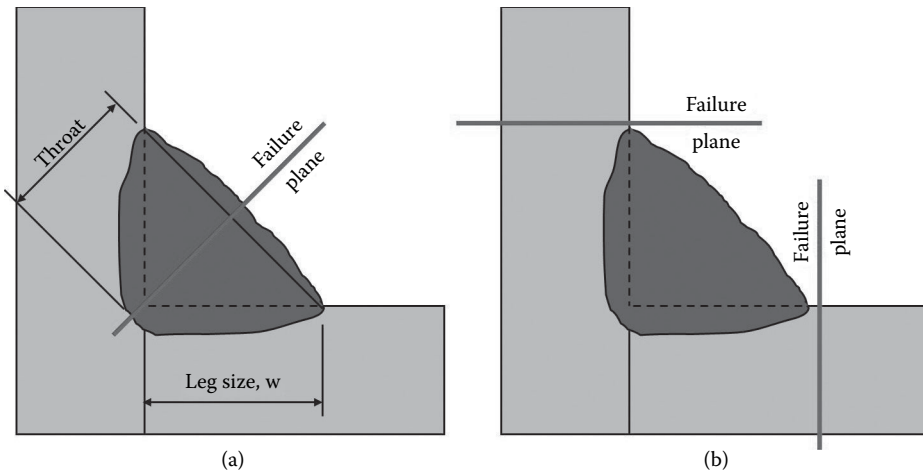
(a) Throat dimension and failure plane of a fillet weld and (b) failure plane of adjacent base metal.
